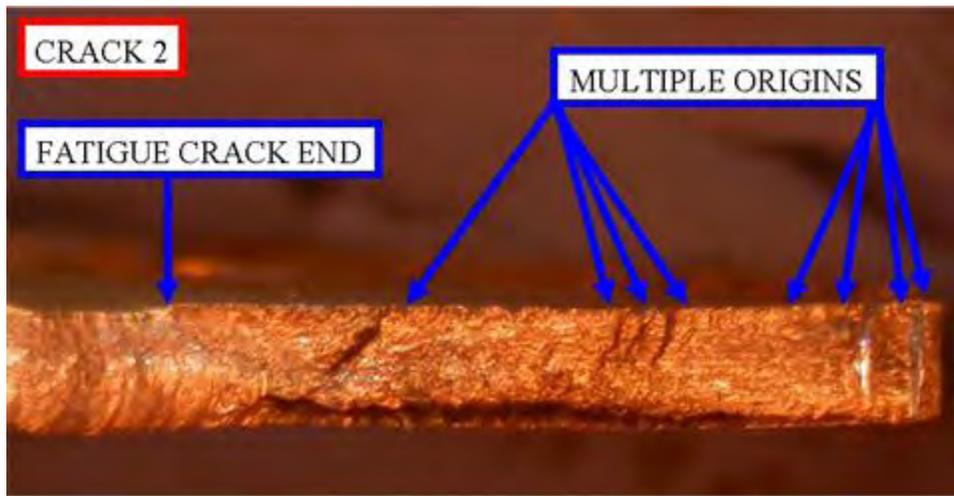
Macroscopic View of Cracks 1 and 2 on the Right Front Spar Attachment FS 104.31
